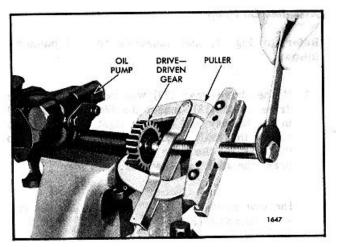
Removing Oil Pump Drive-Driven Gear from Shaft.
